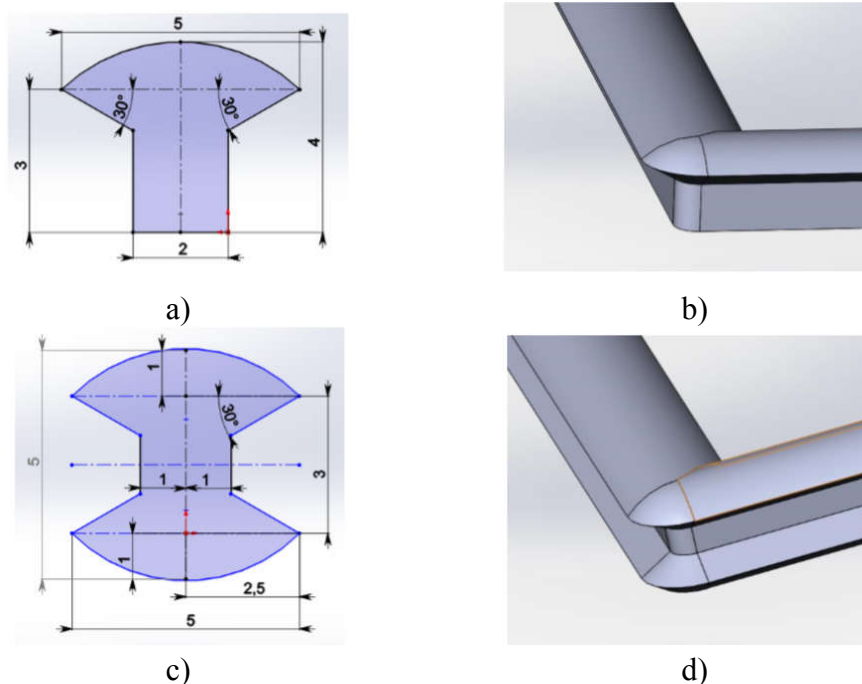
Weld seams: a) a sketch of a Y-shaped seam; b) geometric model of Y-shaped seam; c) a sketch of a X-shaped seam; d) geometric model of X-shaped seam
